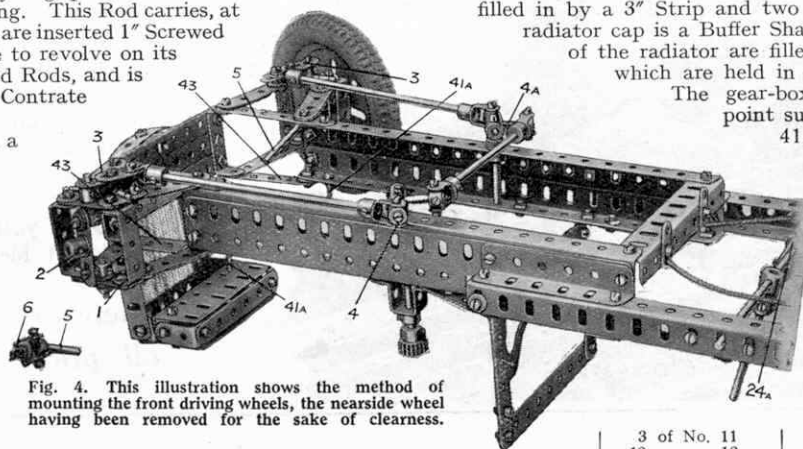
This illustration shows the method of mounting the front driving wheels, the nearside wheel having been removed for the sake of clearness.
